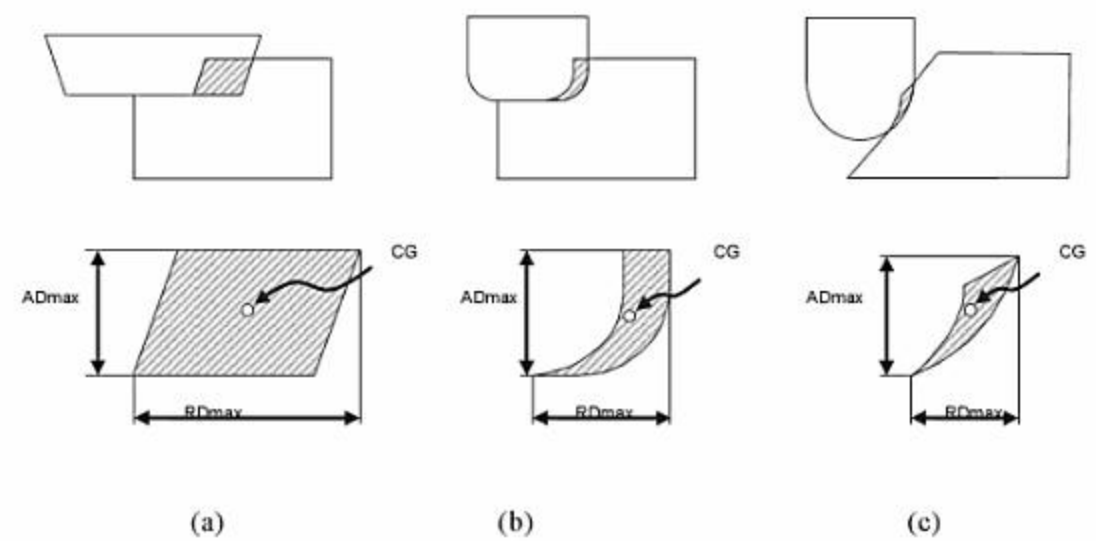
Examples of the cross-section with different milling cutters. a. Face mill; b. bull-nose end mill; c. ball-nose end mill
